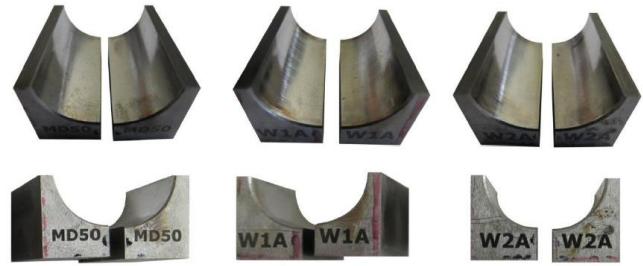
Removed test samples from a blank workpiece [Havlik 2012]
